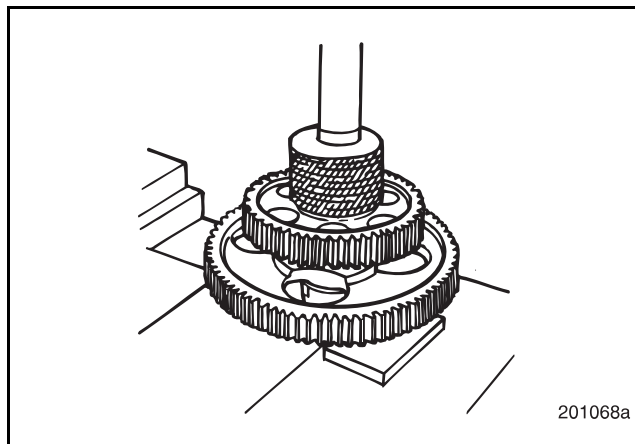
Fuel Injection Pump Driving Gear Installation
